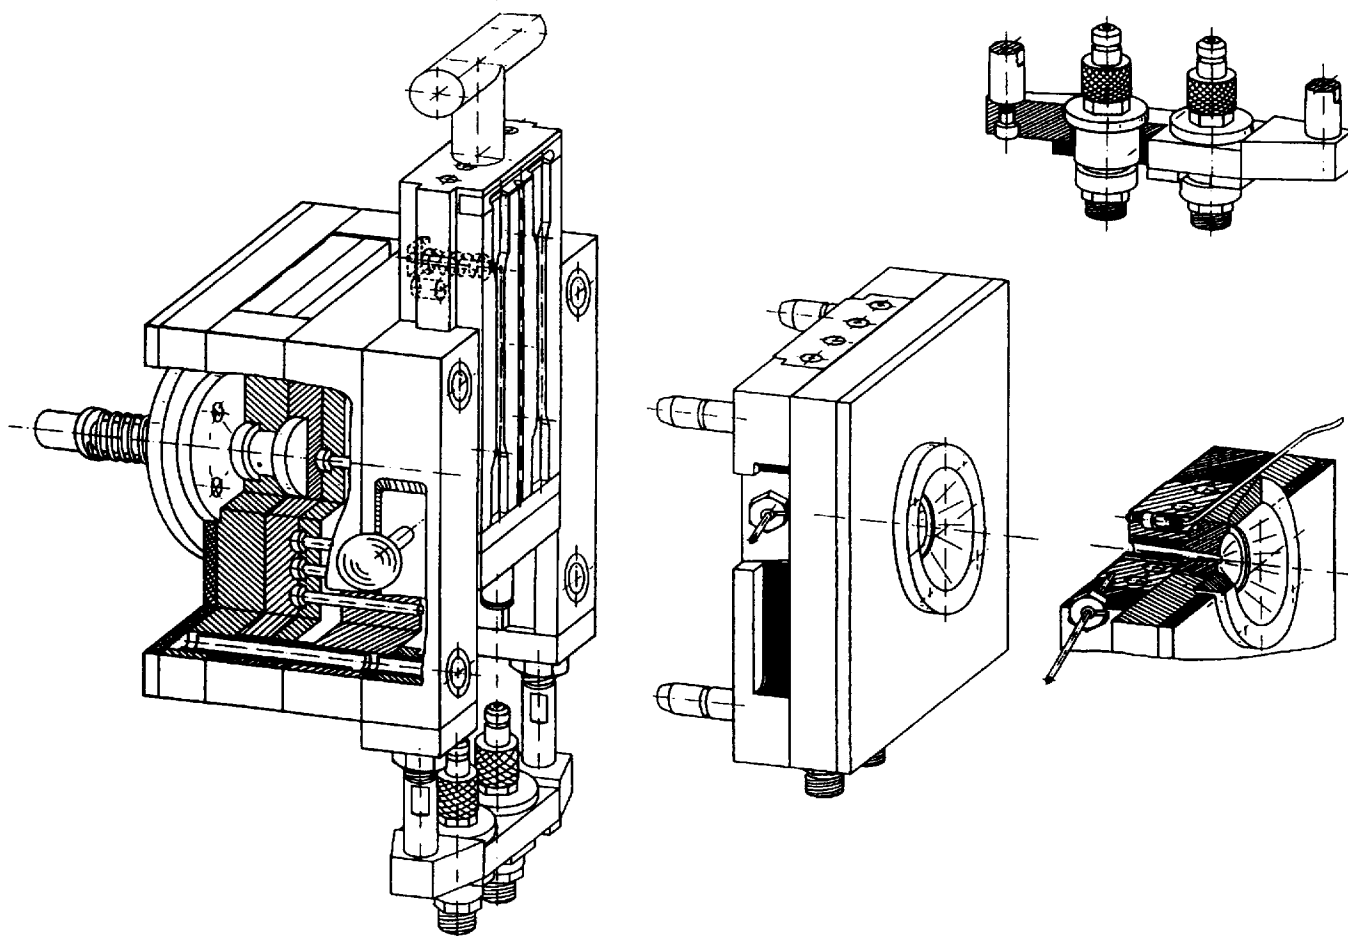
Exploded view of an injection mould with an interchangeable two-cavity plate for a type A ISO mould
